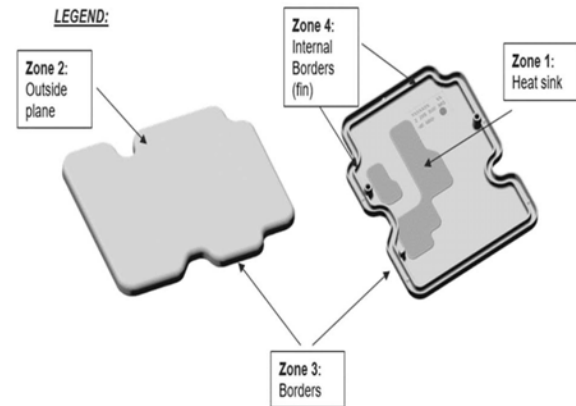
Aluminium die casting component chosen for the evaluation of surface defects: 126x104x76 mm³ (BxWxH)
